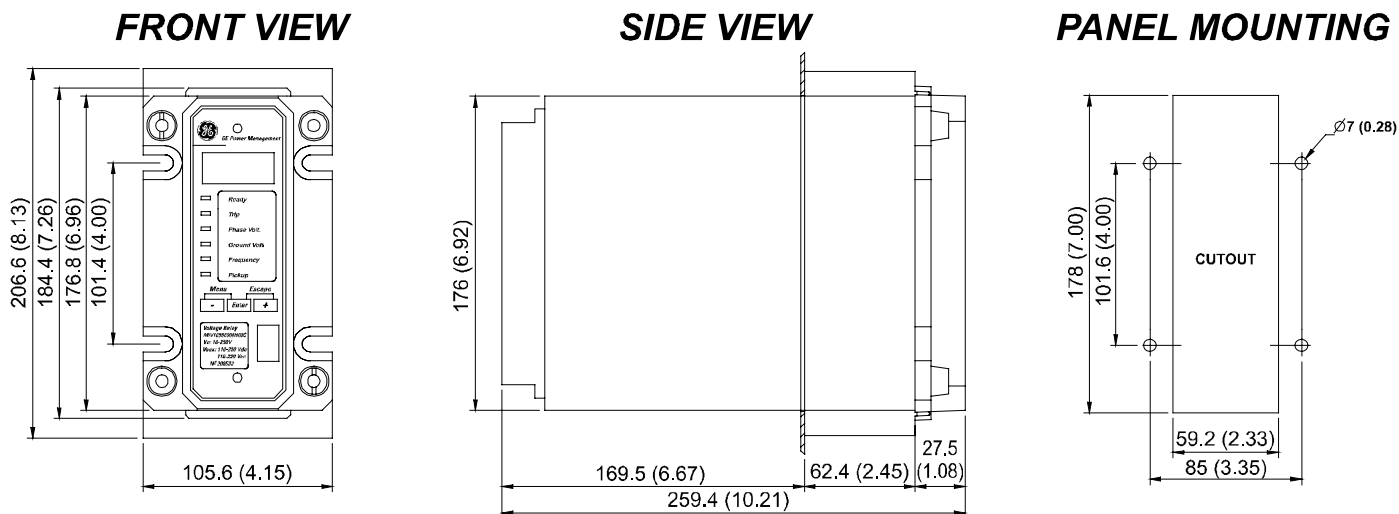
A. MOUNTING AND DIMENSIONS DRAWING FOR MIV MODELS WITH DEPTH REDUCING COLLAR
